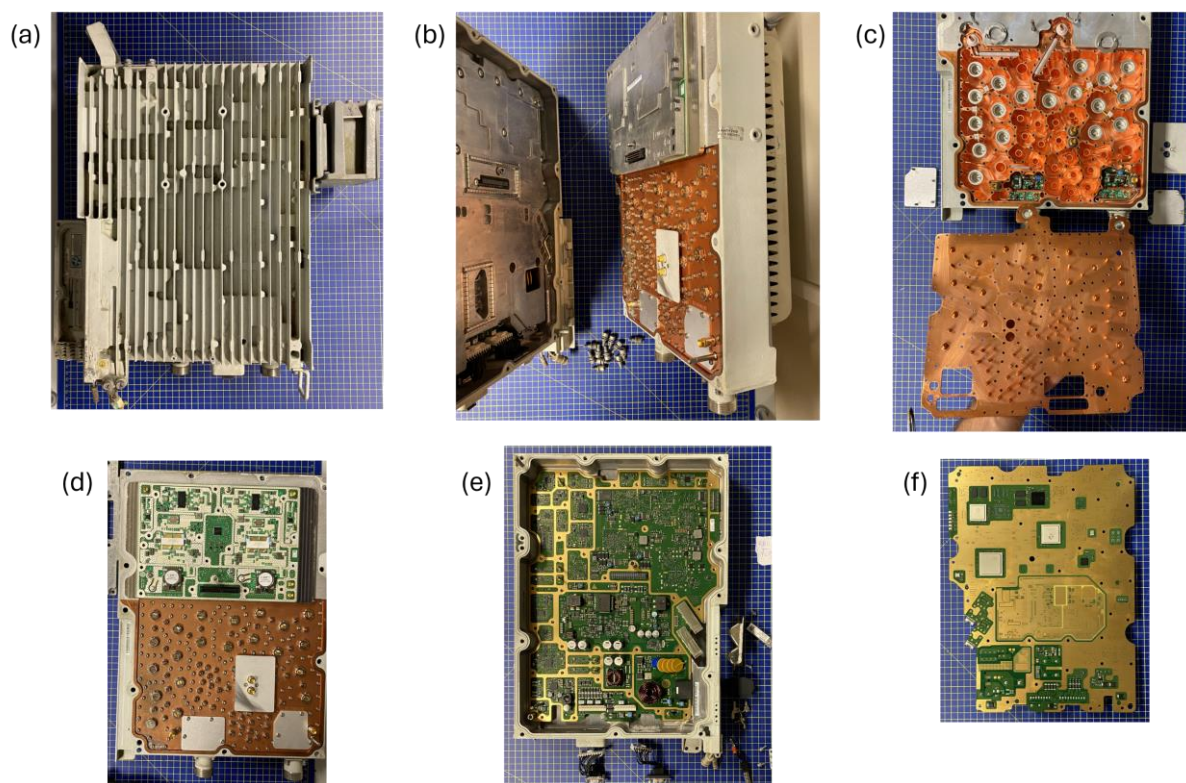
Picture of the teardown of the RRU: (a) the side view of the complete RRU, (b) its two main parts once opened, (c) the disassembled cavity filters connected to the two external coaxial connectors, (d) the PCBA comprising the two power amplifiers (one per layer and hence per TX channel) above the duplexer and filters, (e) the front of the main PCBA, and (f) the rear of the main PCBA
